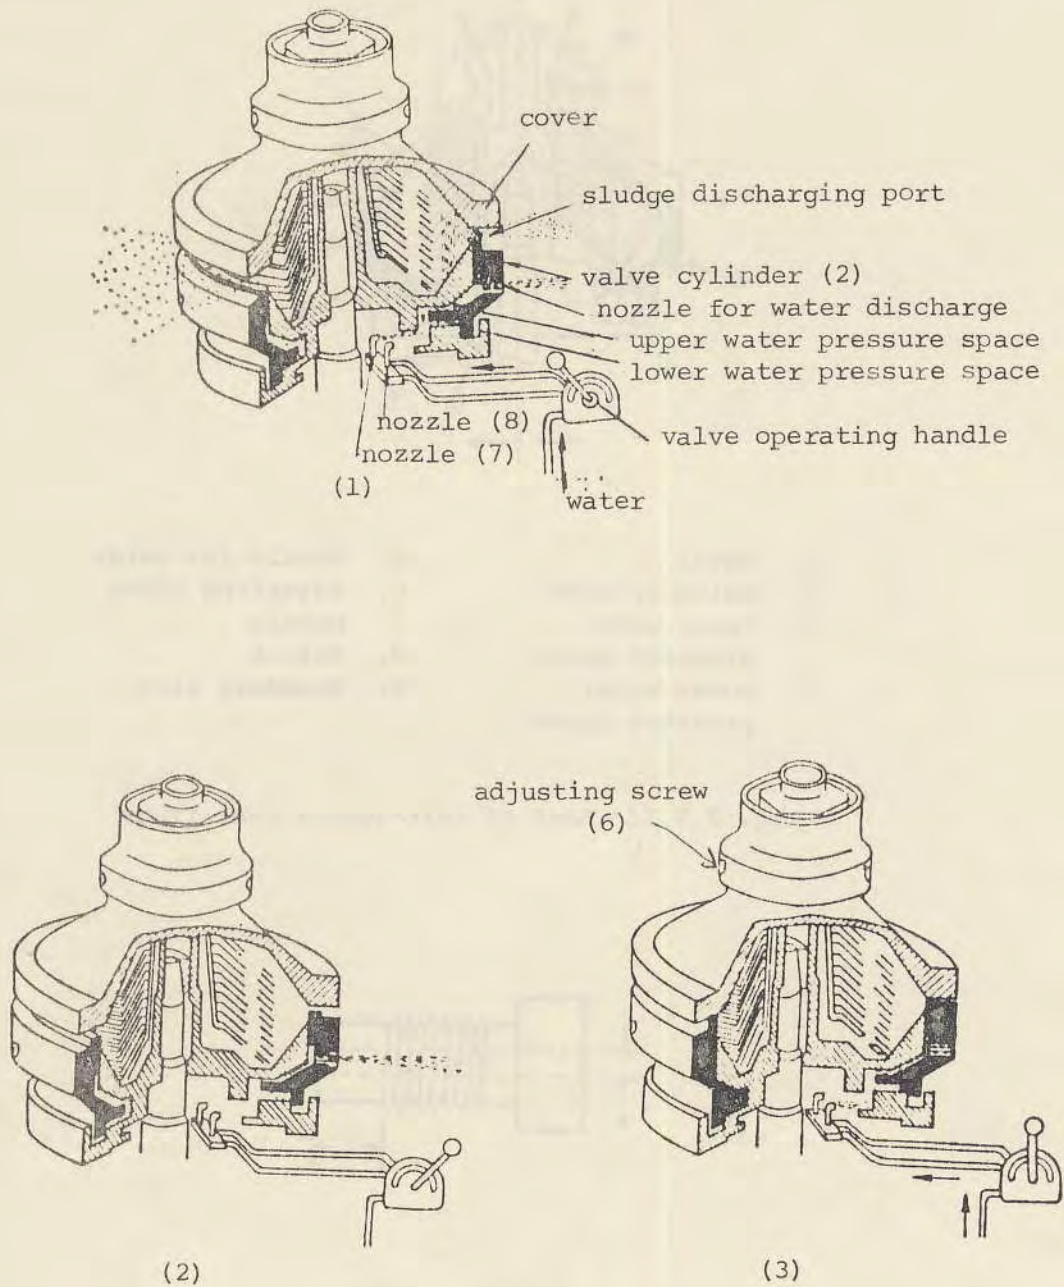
Sludge discharging of self-jector centrifuge
